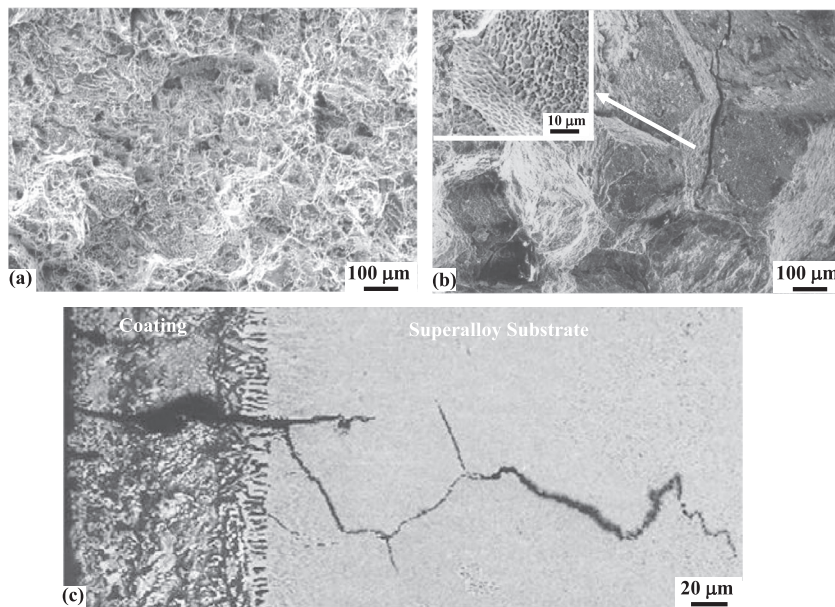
Secondary SEM images illustrating the morphology of surfaces exposed by the open crack in Fig. 5a and secondary cracks. (a) Fracture by microvoid coalescence in the slant section (mode III). (b) Intergranular fracture in the flat section with microvoid coalescence in separated grain facets (mode I). (c) Secondary crack along the coating and into the superalloy substrate.
